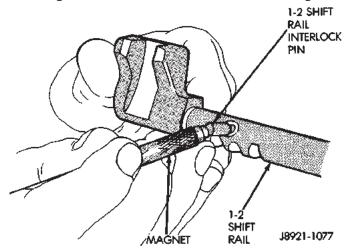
Install 1-2 Shift Rail Interlock Pin
